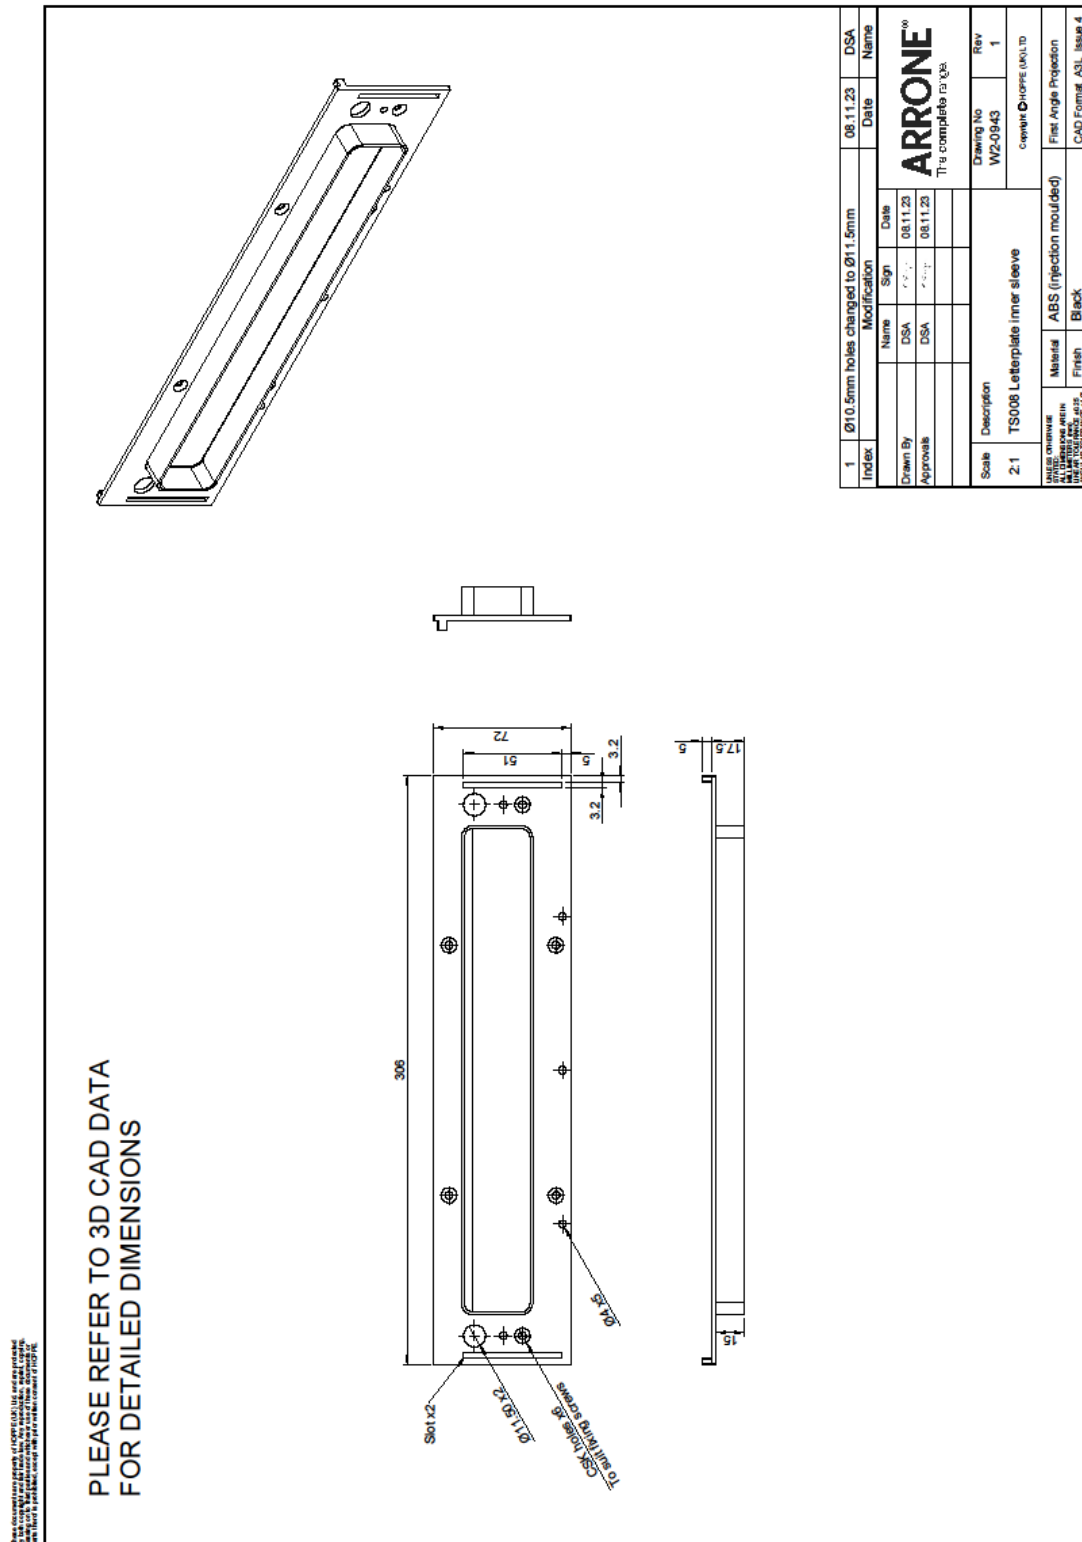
Client Inward Drawings – Letterplate Inner Sleeve
